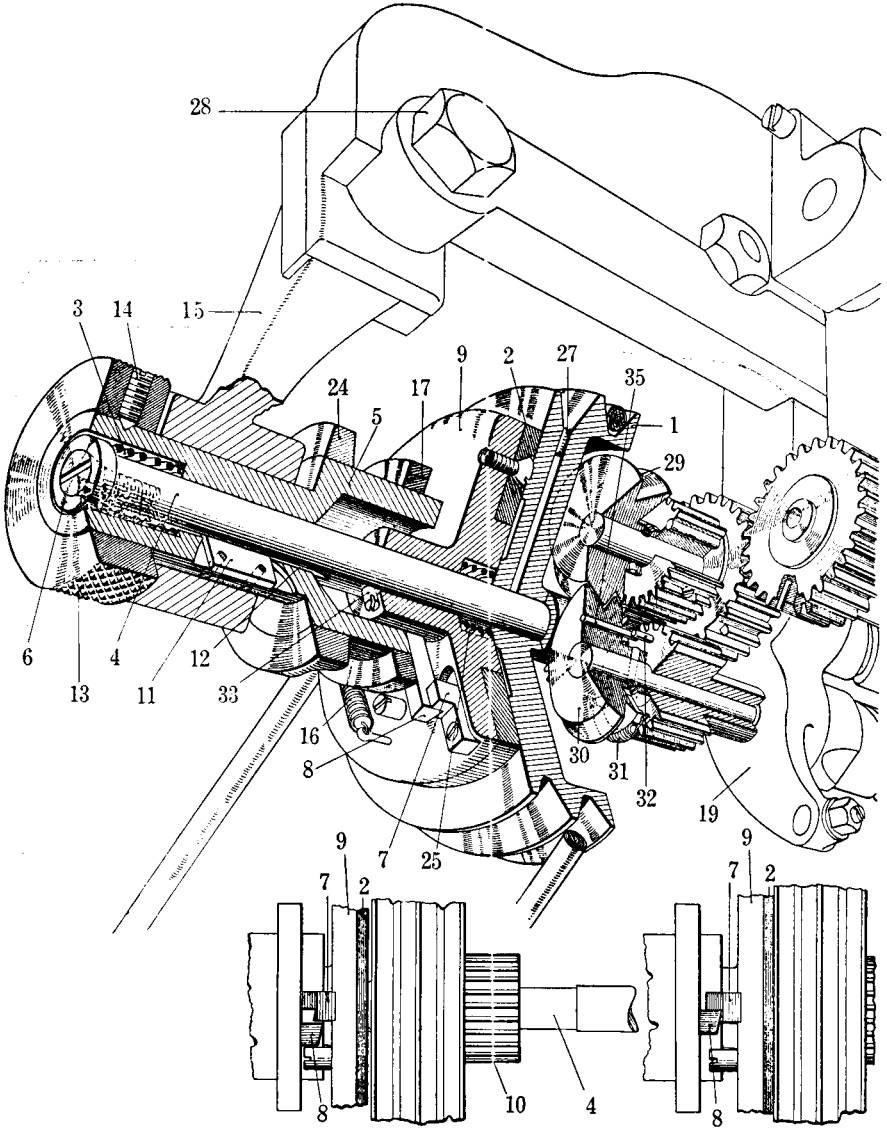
Perspective sectional view showing details of the distributor clutch. The lower left-hand view shows the stop blocks out of mesh, their position when the distributor is stopped. The lower right-hand view shows the stop blocks in mesh to drive the distributor.
